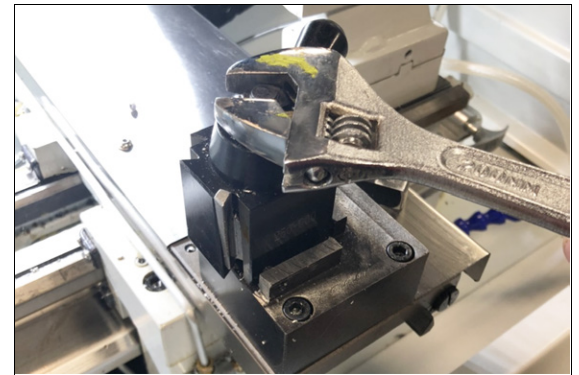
Tool post nut securely tightened with an adjustable wrench.
